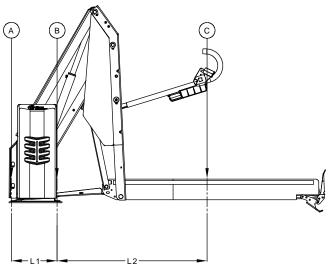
FLOOR STRENGTH REQUIREMENTS
